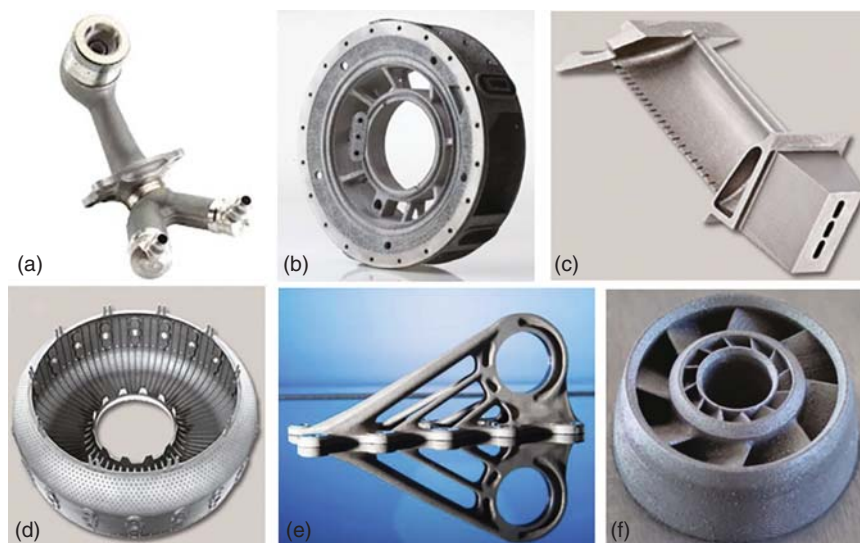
(a) GE LEAP engine fuel nozzle fabricated through LPBF. (b) Compressor supporting casing for a gas turbine engine fabricated by EBM. (c) LPBF-printed turbine blade with internal cooling channels, (d) LPBF-printed engine housing unit, and (e) the first LPBF-printed titanium bracket connector for the Airbus A350 XWB. Source: Reproduced with permission from General Electric. (f) Hollow static turbine blade cast with its mold and cores fabricated by MBJ. Source: Reproduced with permission from PROMETAL S.A.R.L.
